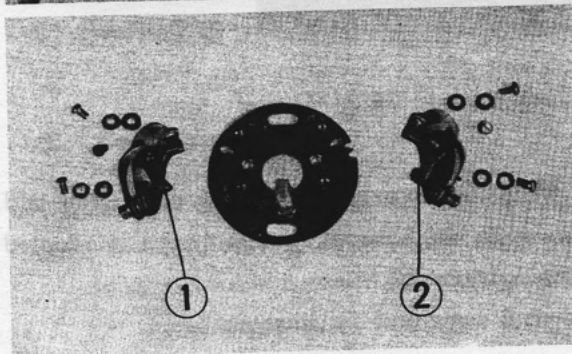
Contact breaker of Model CB72, 77-I type
